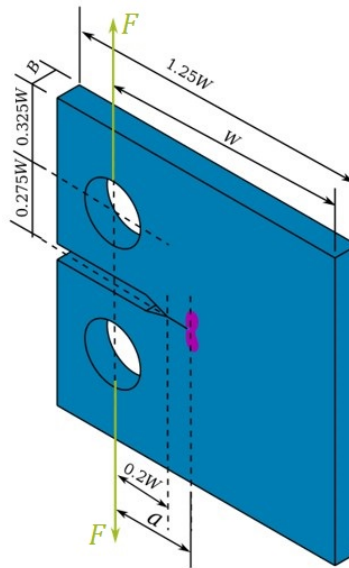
Compact tension specimen for tensile fracture test and its key dimensions.
